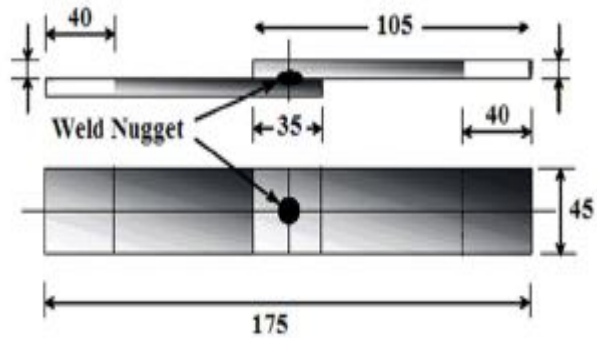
Tensile-shear test sample dimensions (mm) [24]
